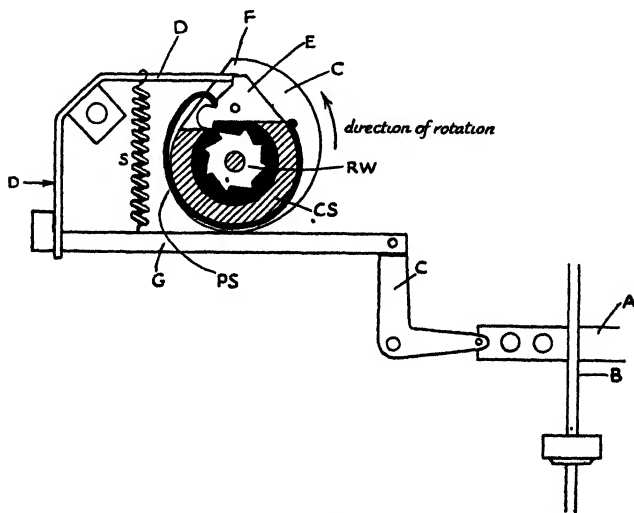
ILLUSTRATING THE ONE REVOLUTION CLUTCH MECHANISM.
